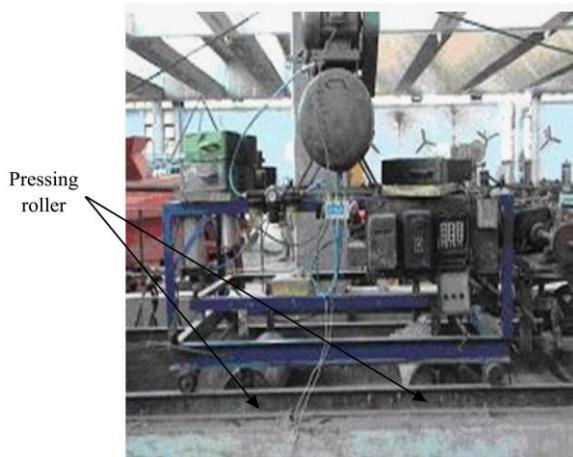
View of compressor, pneumatic cylinders and controls used for tool carriage
